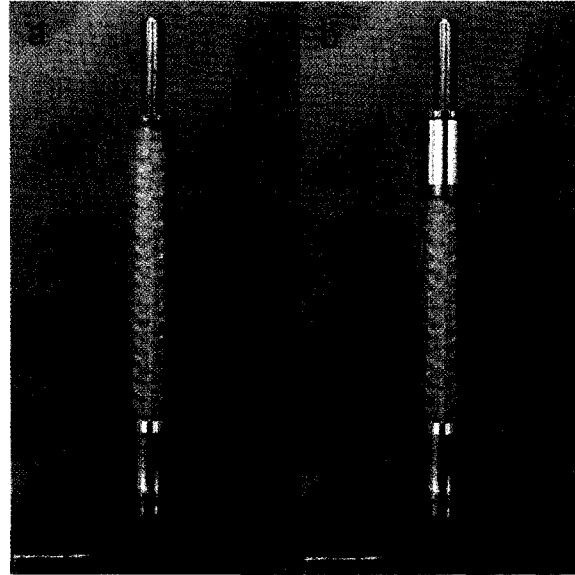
End tab bonding jig on the hot plate. a) First end tab is aligned and bonded, b) Second end tab is aligned and bonded.
